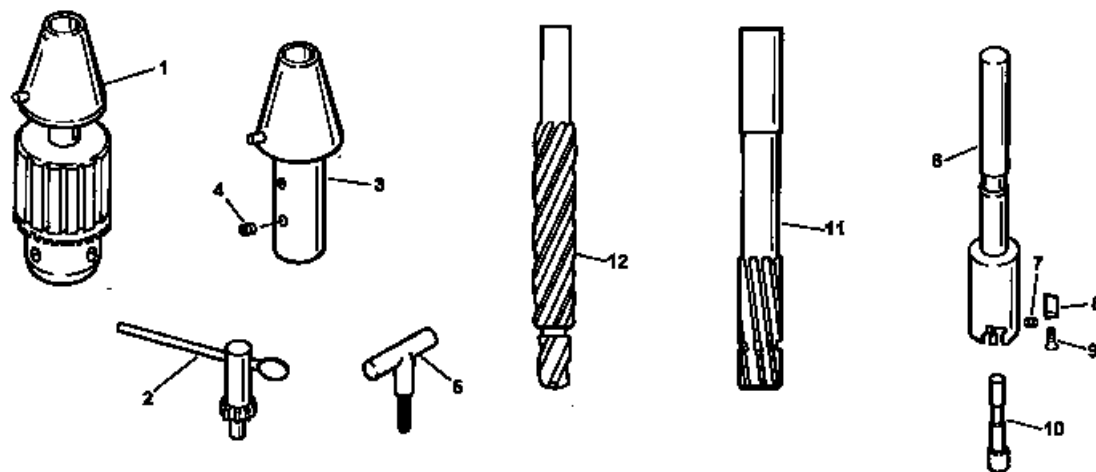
FIGURE P - REAMER, SPOTFACER KIT, & VALVE GUIDE KIT
